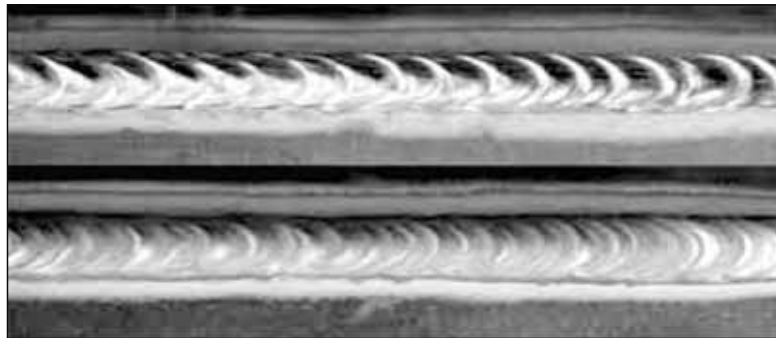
Weld metal deposit using high basic fluxes
